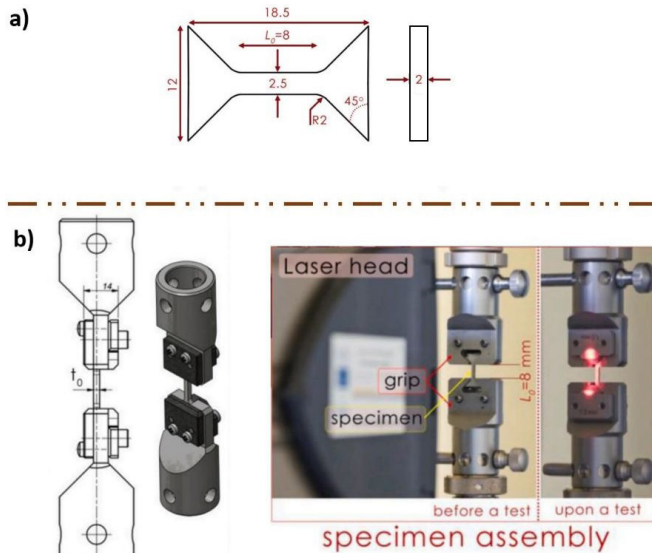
(a) Configuration of the non-standard specimen for tensile tests, (b) Drawing of the applied sample grip and a macro view of the experimental setup comprising a 10 kN tensile machine and a non-contact speckle-type laser extensometer.
